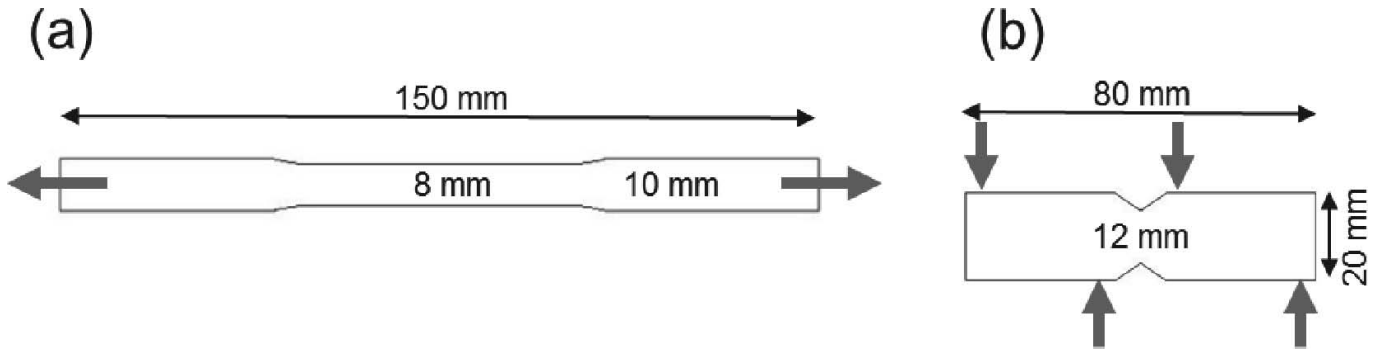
Specimen geometry and dimensions used for the experiments: a) Tensile specimen with dimensions of $150 \times 10(8) \times 5 \text{ mm}^3$; b) Iosipescu specimen with dimensions of $80 \times 20(12) \times 5 \text{ mm}^3$ and notch angle of 110° .
